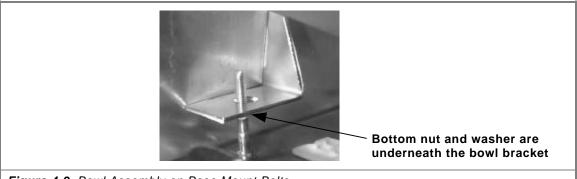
Bowl Assembly on Base Mount Bolts.
